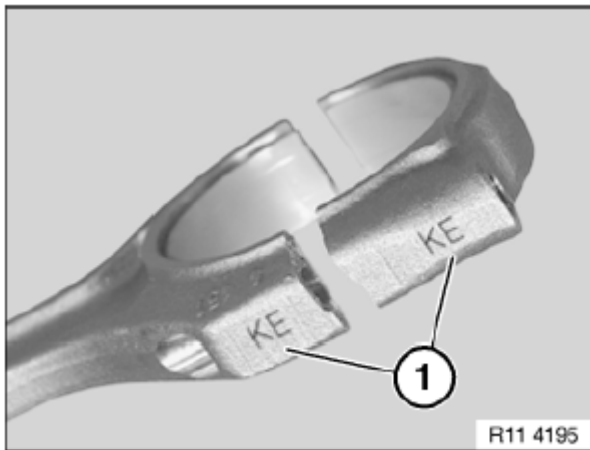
Identifying Conrod Bearing Cap Pairing Letters
